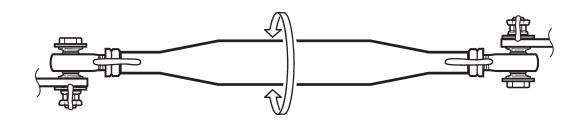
A ROD END CENTERING (Position rod ends for maximum rotation)
